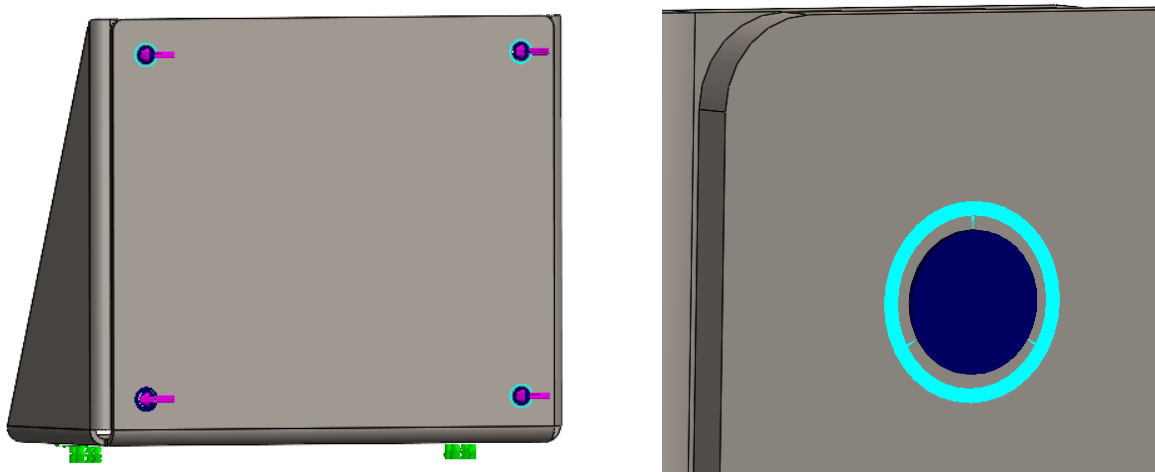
BRACKET 2 FIXTURES & LOADING CONDITIONS (LEFT) & PIN CONNECTION (RIGHT)
